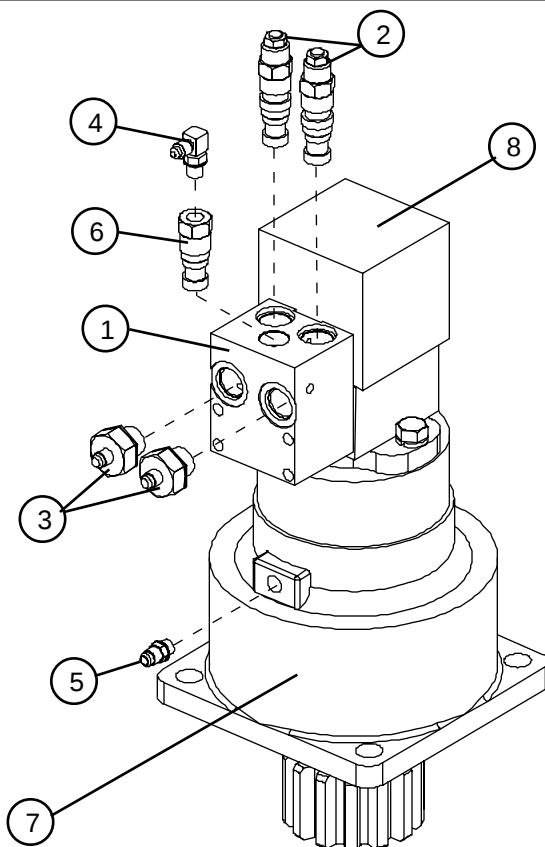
BRAKE MANIFOLD ASSEMBLY
